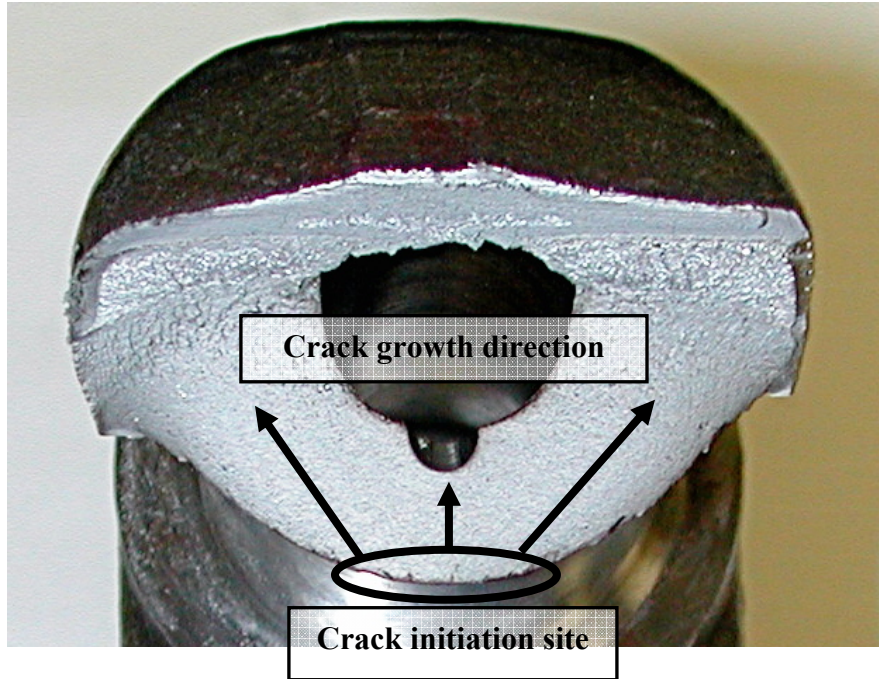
Example of a typical fatigue fracture surface for the forged steel crankshaft.
